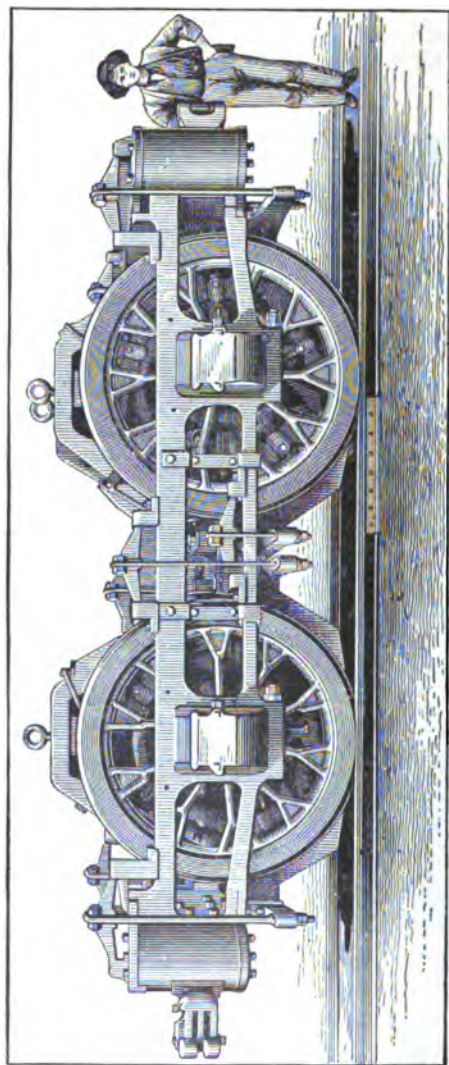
SIDE VIEW OF ONE TRUCK.
